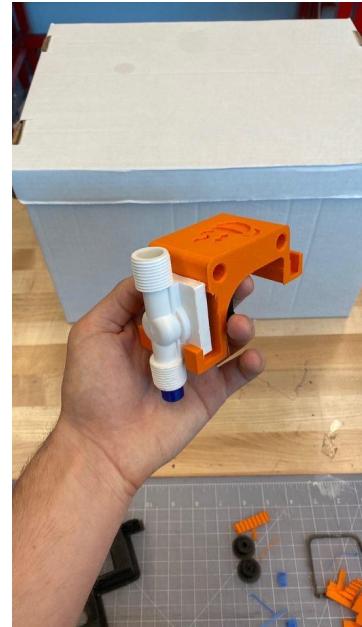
3D printed piece to hold the solenoid valve in place at the center of the drawing arms.
